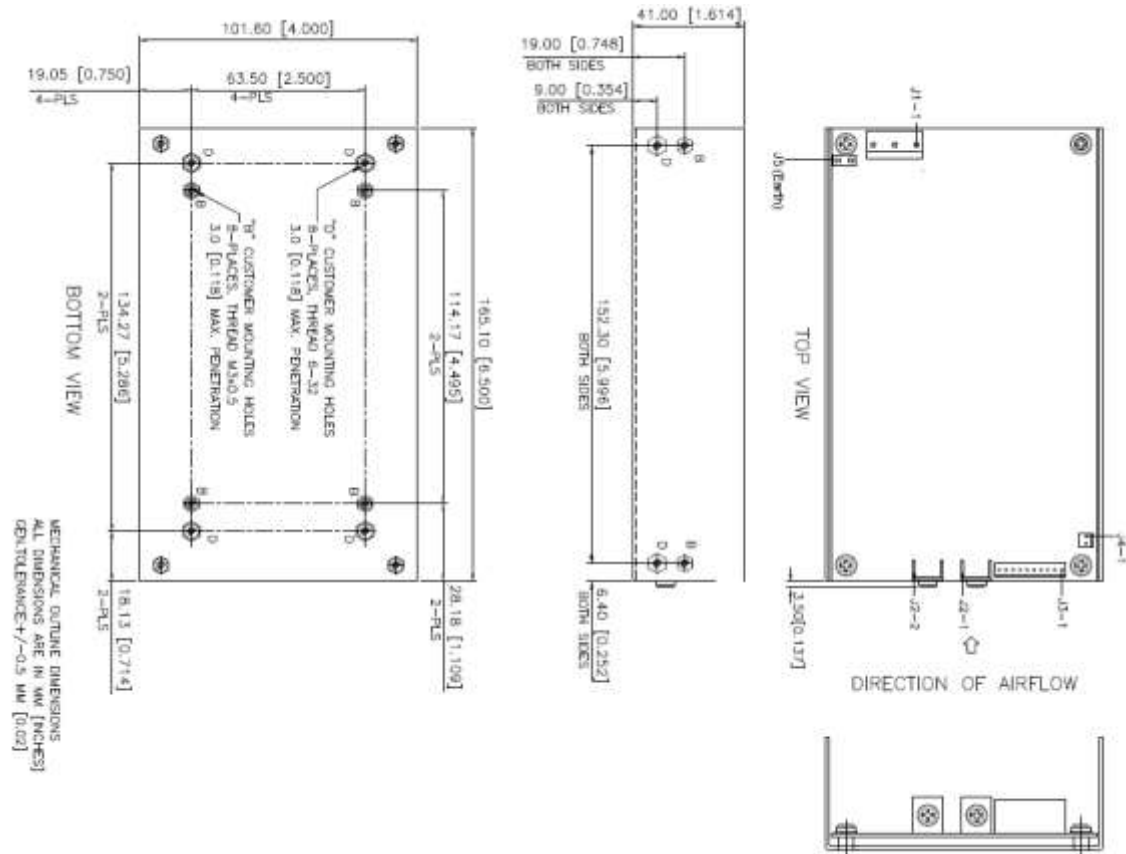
Dimensions Drawing (With Top Fan Mounting)
